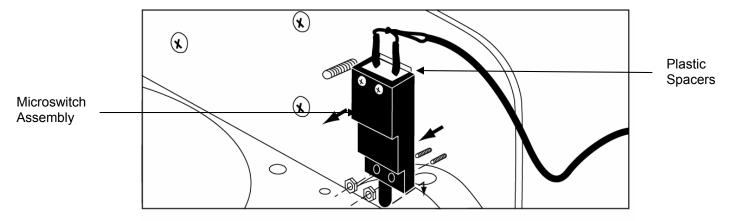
Hose Microswitch Assembly Exploded-View Diagram
